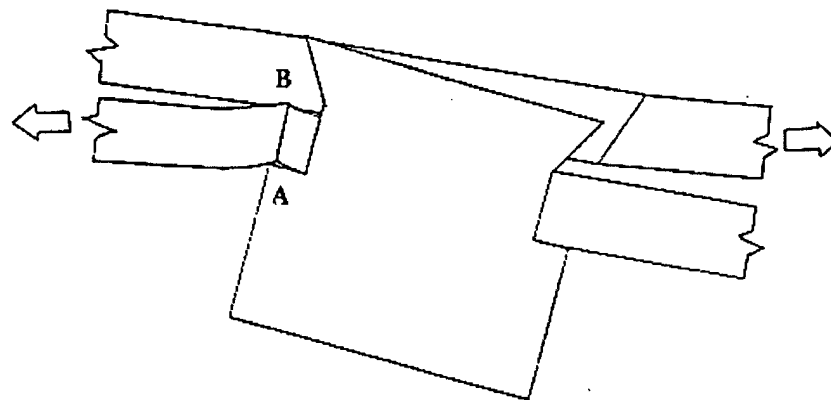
Schematic representation of a riveted lap joint under tensile load. The head of the tilted rivet presses against the lower panel at A, this forces the sharp, lower panel-hole edge against the displaced upper panel at B, producing fretting damage at that location.
